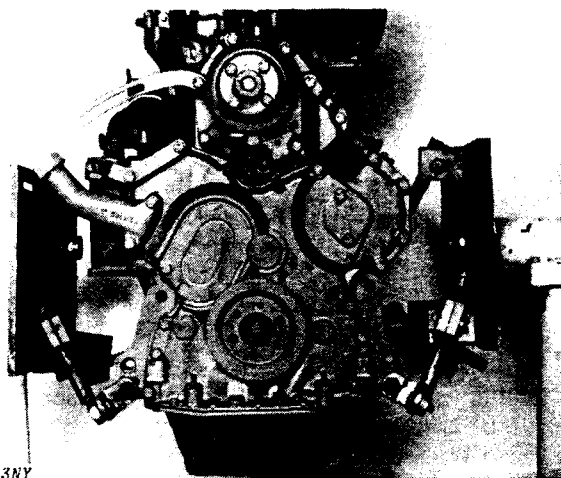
Three or Four Cylinder Engine Mounted in D01003AA Engine Stand
